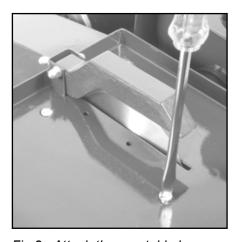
Attach the saw table by installing and tightening the 4 flat head machine screws
